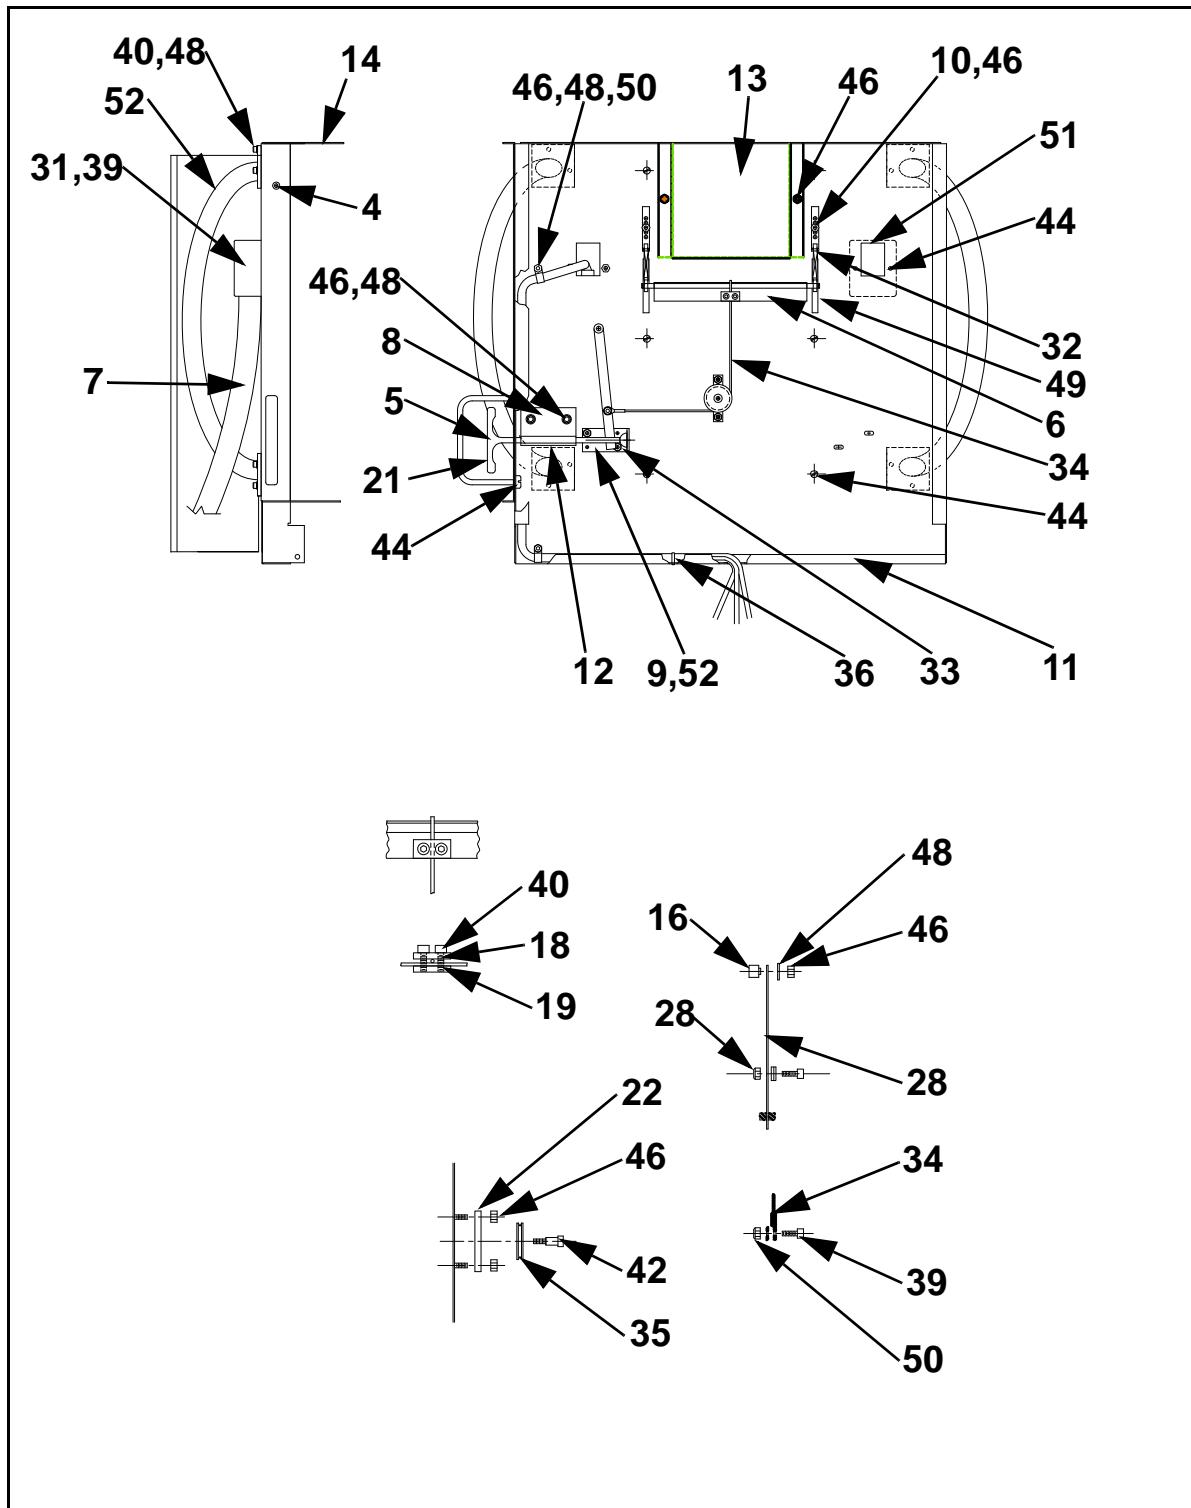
Vertical Carriage & Frame Assembly (Sheet 2 of 2)
